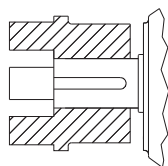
Place coupling flush with end of motor shaft and tighten setscrew.
